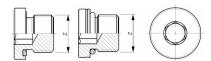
VSTI screw plugs with ED seal (left), with o-ring (right)
